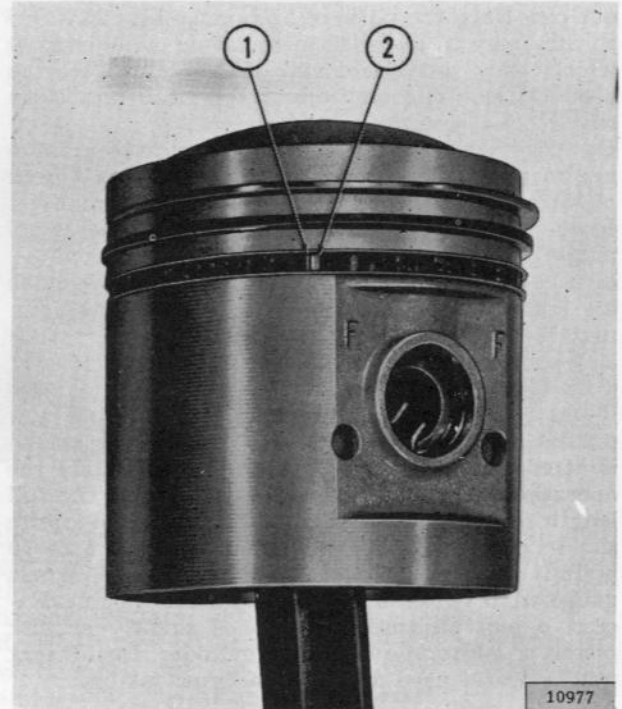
CORRECTLY ASSEMBLED SEALED POWER PISTON RINGS
